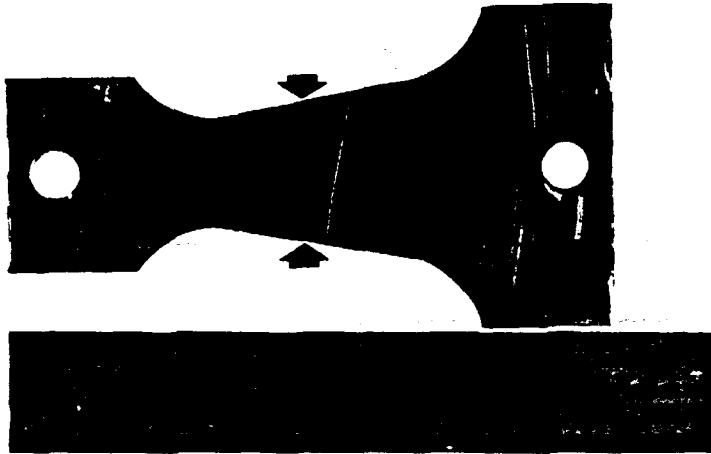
Typical cantilever bending HCF specimen which has been laser machined. The constant stress gauge section is 0.5" long. The dark areas adjacent to the edges of the specimen (arrows) is oxidation cause by the heat generated during laser machining.
